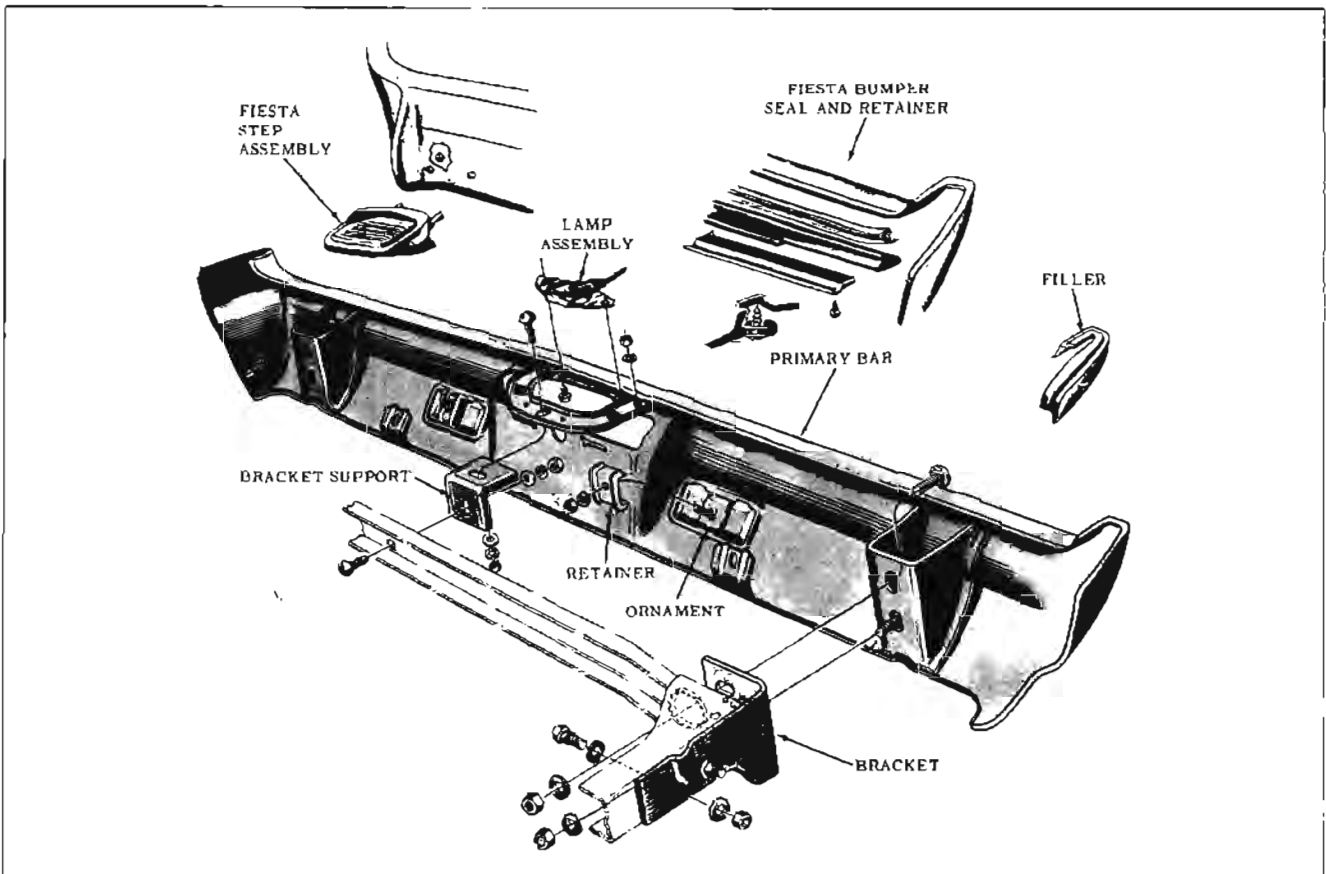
Rear Bumper Assembly (32, 35 & 36 Series)
